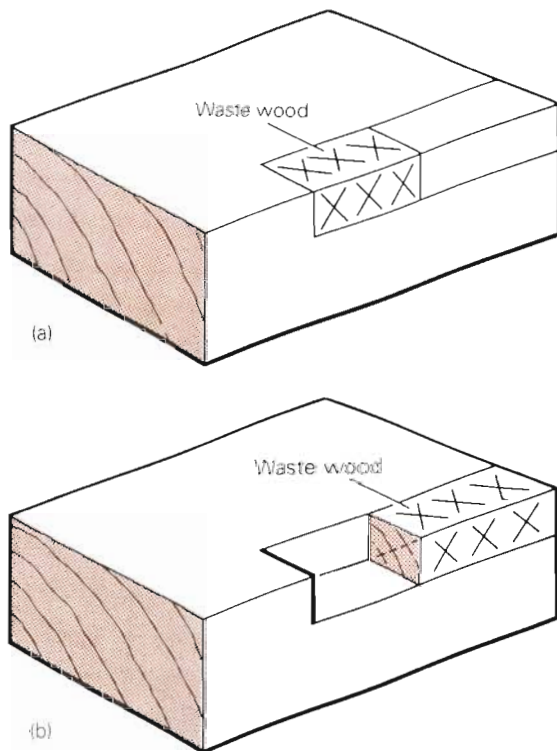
Cutting a stopped rebate: (a) cut out a piece, (b) remove the waste.
